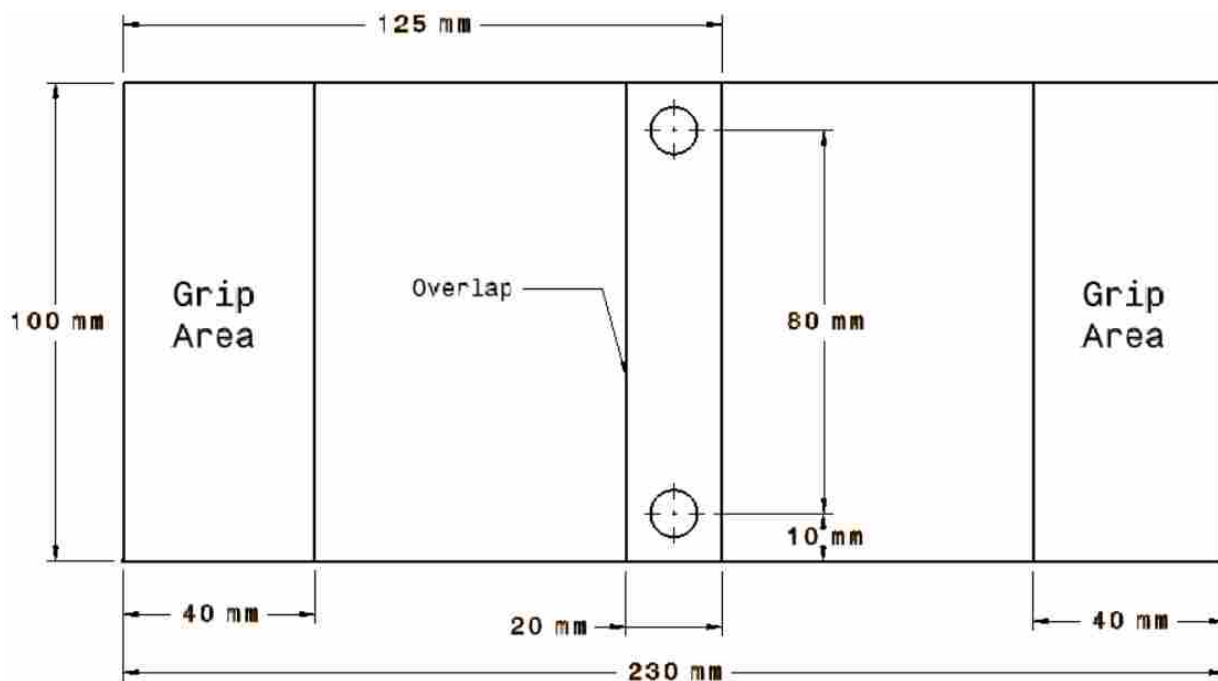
2 Weld, 80mm Spacing on 100mm Wide Lap-Shear Specimens
